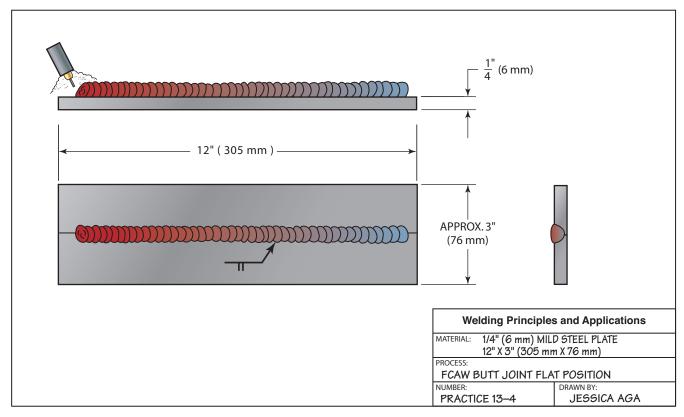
FCAW butt joint, 1/4-in. (6-mm) mild steel flat position.
